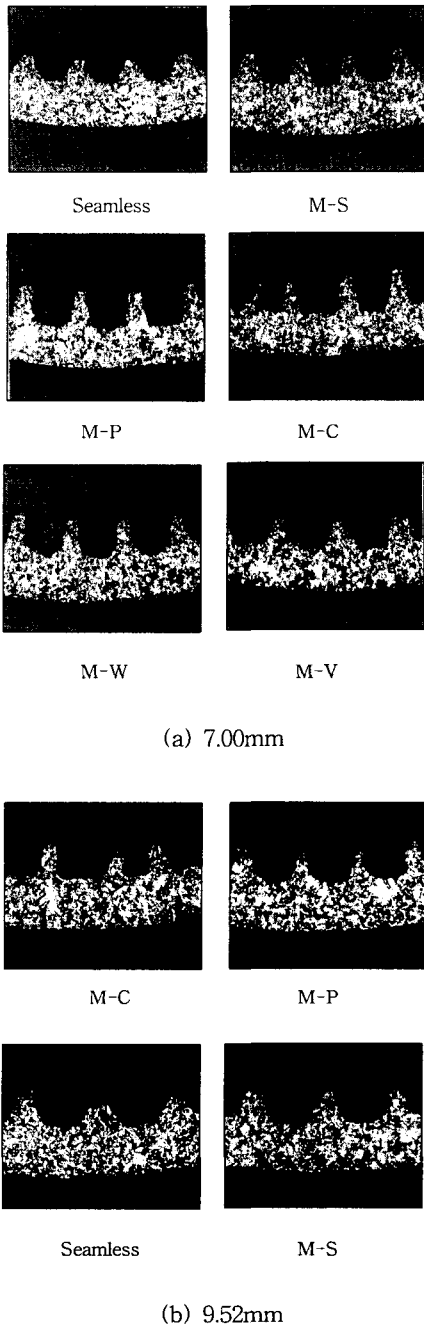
Enlarged cross-sectional shapes of inner micro-fin tube.
